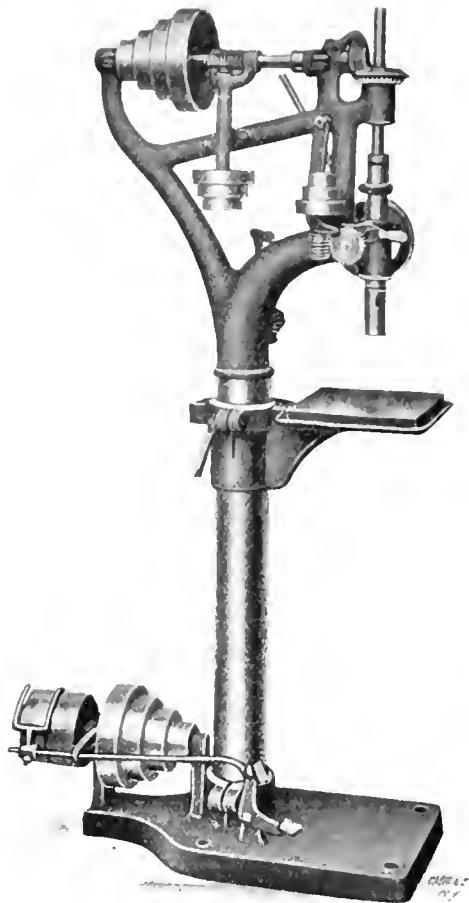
Hoefler 16-inch Drill arranged with Power Feed.
